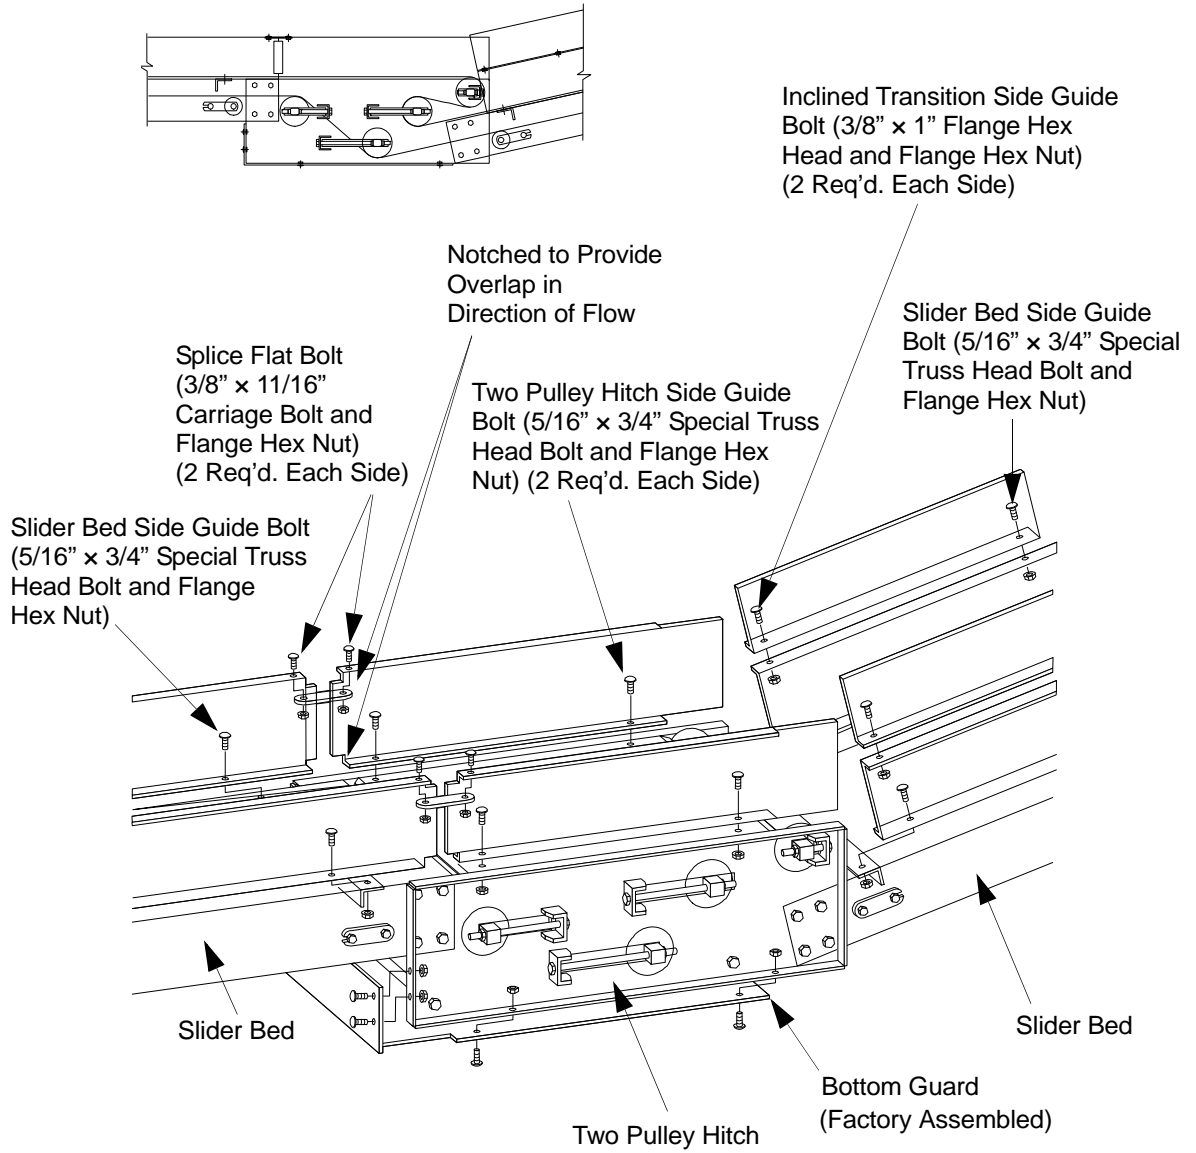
Two-Pulley Hitch Side Guide Assembly
